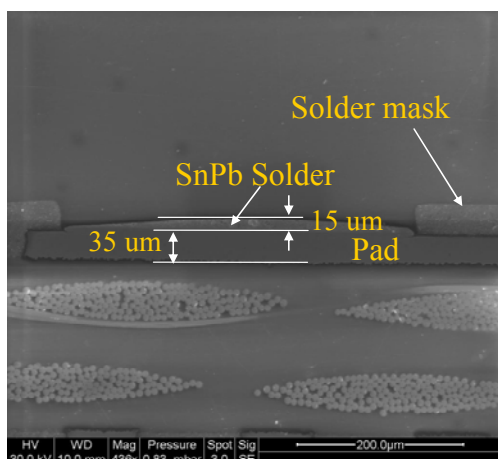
Cross-section of BGA pad area after solder ball removal using low-temperature wave solder method
